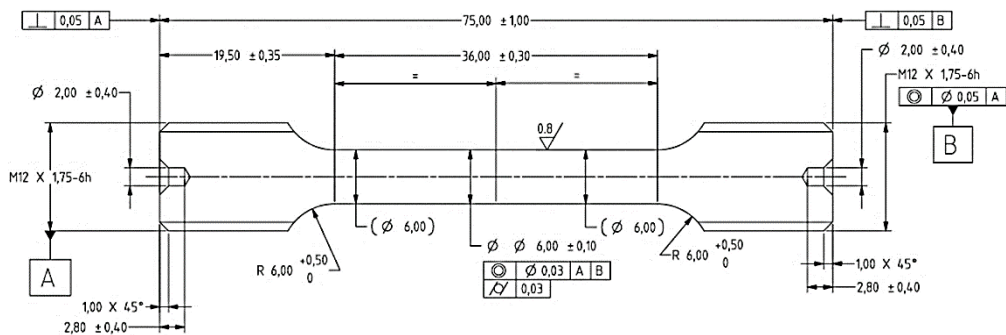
A technical drawing of room and elevated temperature tensile test specimen.
